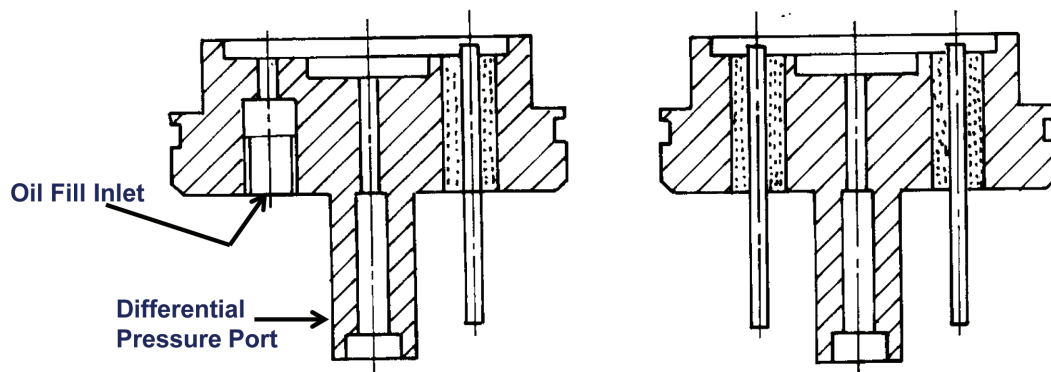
Header Assembly for Differential Pressure Sensor (a) with provision for oil filling and extension for Evacuation /pressurization (b) with extension for easy evacuation/ pressurization.
